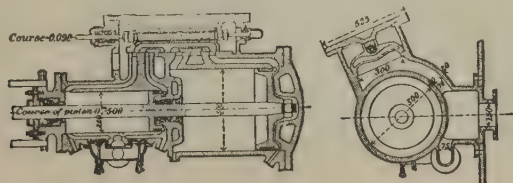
CYLINDERS OF MEKARSKI MOTOR.
